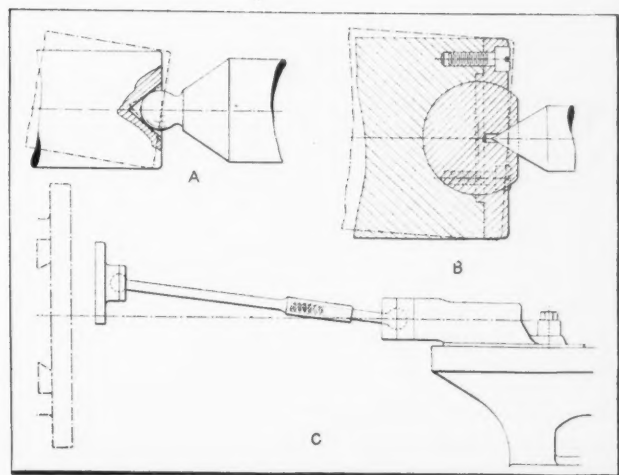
(A) Ball-pointed Center for Angular Positions of Work; (B) Ball and Socket Bar; (C) Ball Center and Spring Plunger Device used with Oval Chucks
